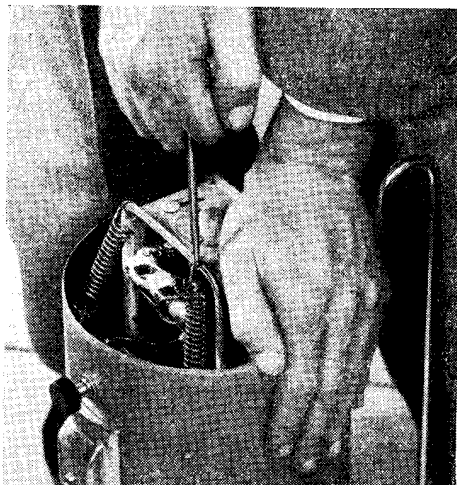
The floating power unit is held by springs against a rubber cushion. To remove the unit, the springs are unhooked from the motor frame
